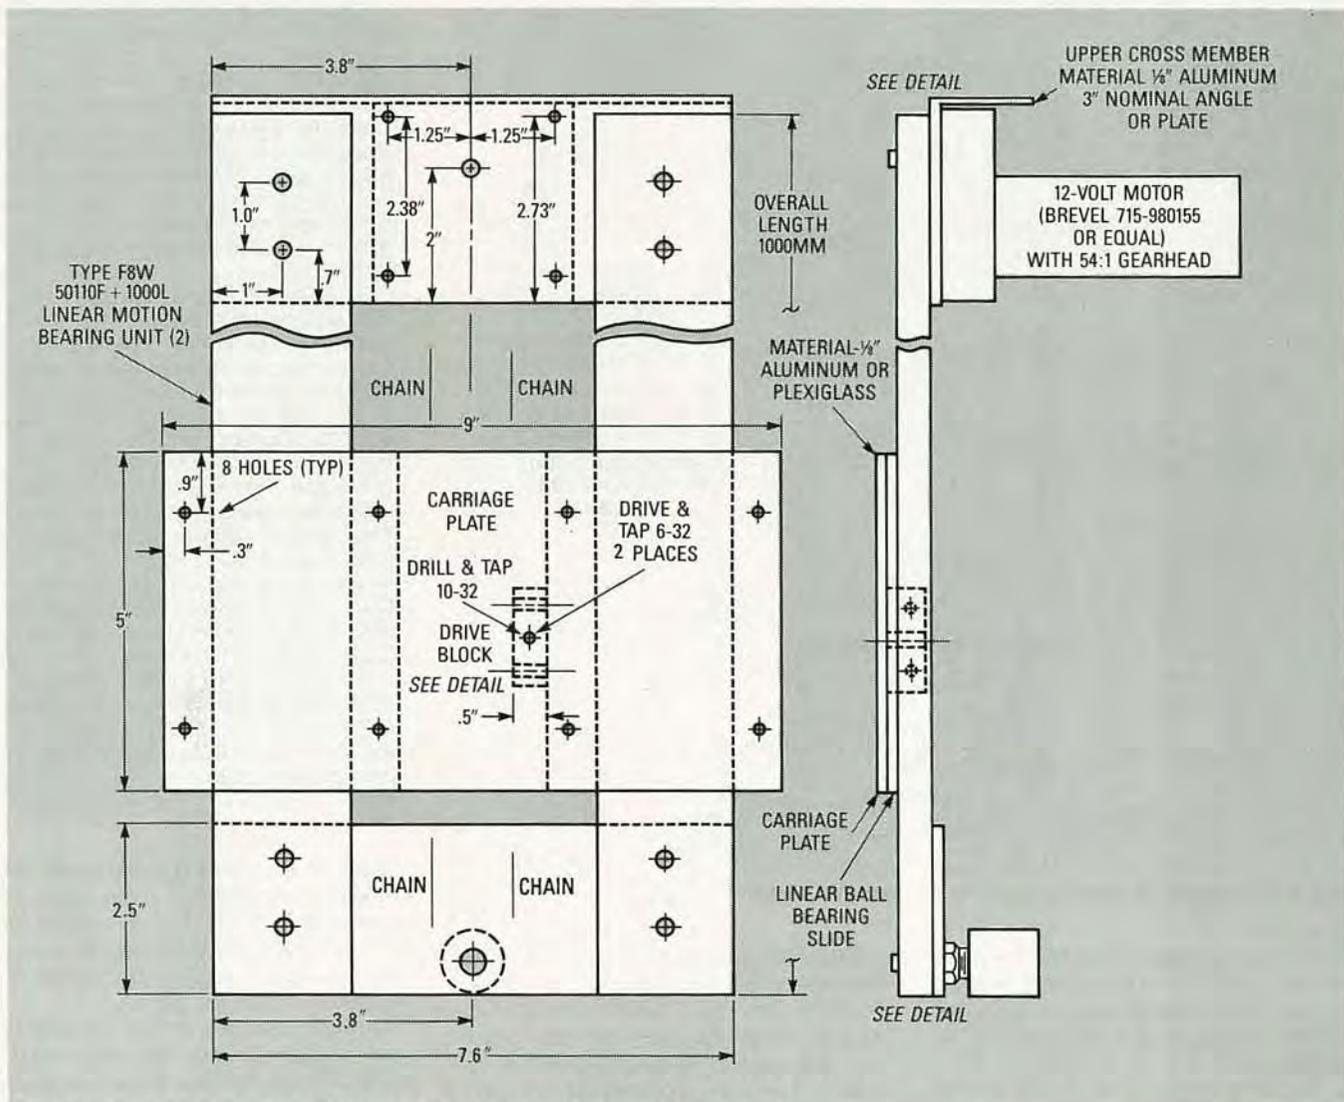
THE ROBOT ARM can be fabricated using the mechanical drawings shown here.
